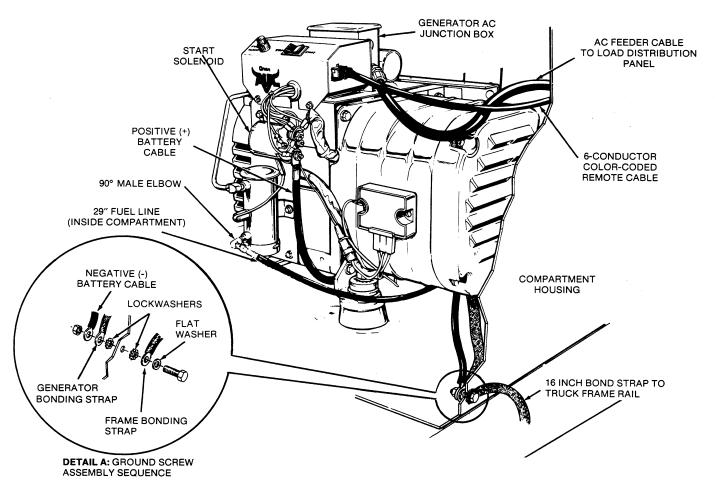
BATTERY AND GROUND CABLE CONNECTIONS FOR OVER-THE-RAIL MOUNTED INSTALLATIONS ONLY
